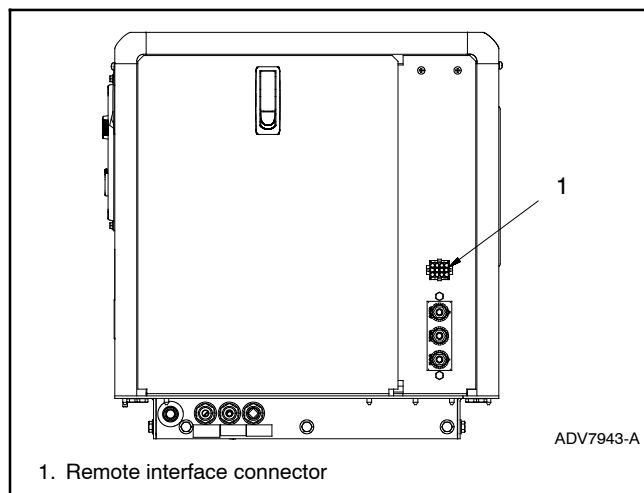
Remote Customer Interface Connector, (Shown on a Sound Shielded Unit)
